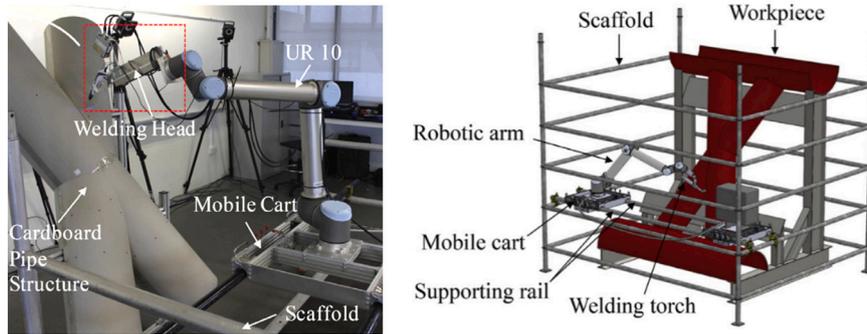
The robotic system and the lab experimental setup introduced by Dharmawan et al. [43] and Chen et al. [88] consists of a representative dummy weld head equipped with a 2D laser scanner and a 1:1 scale mock-up jackup rig pipe structure.
